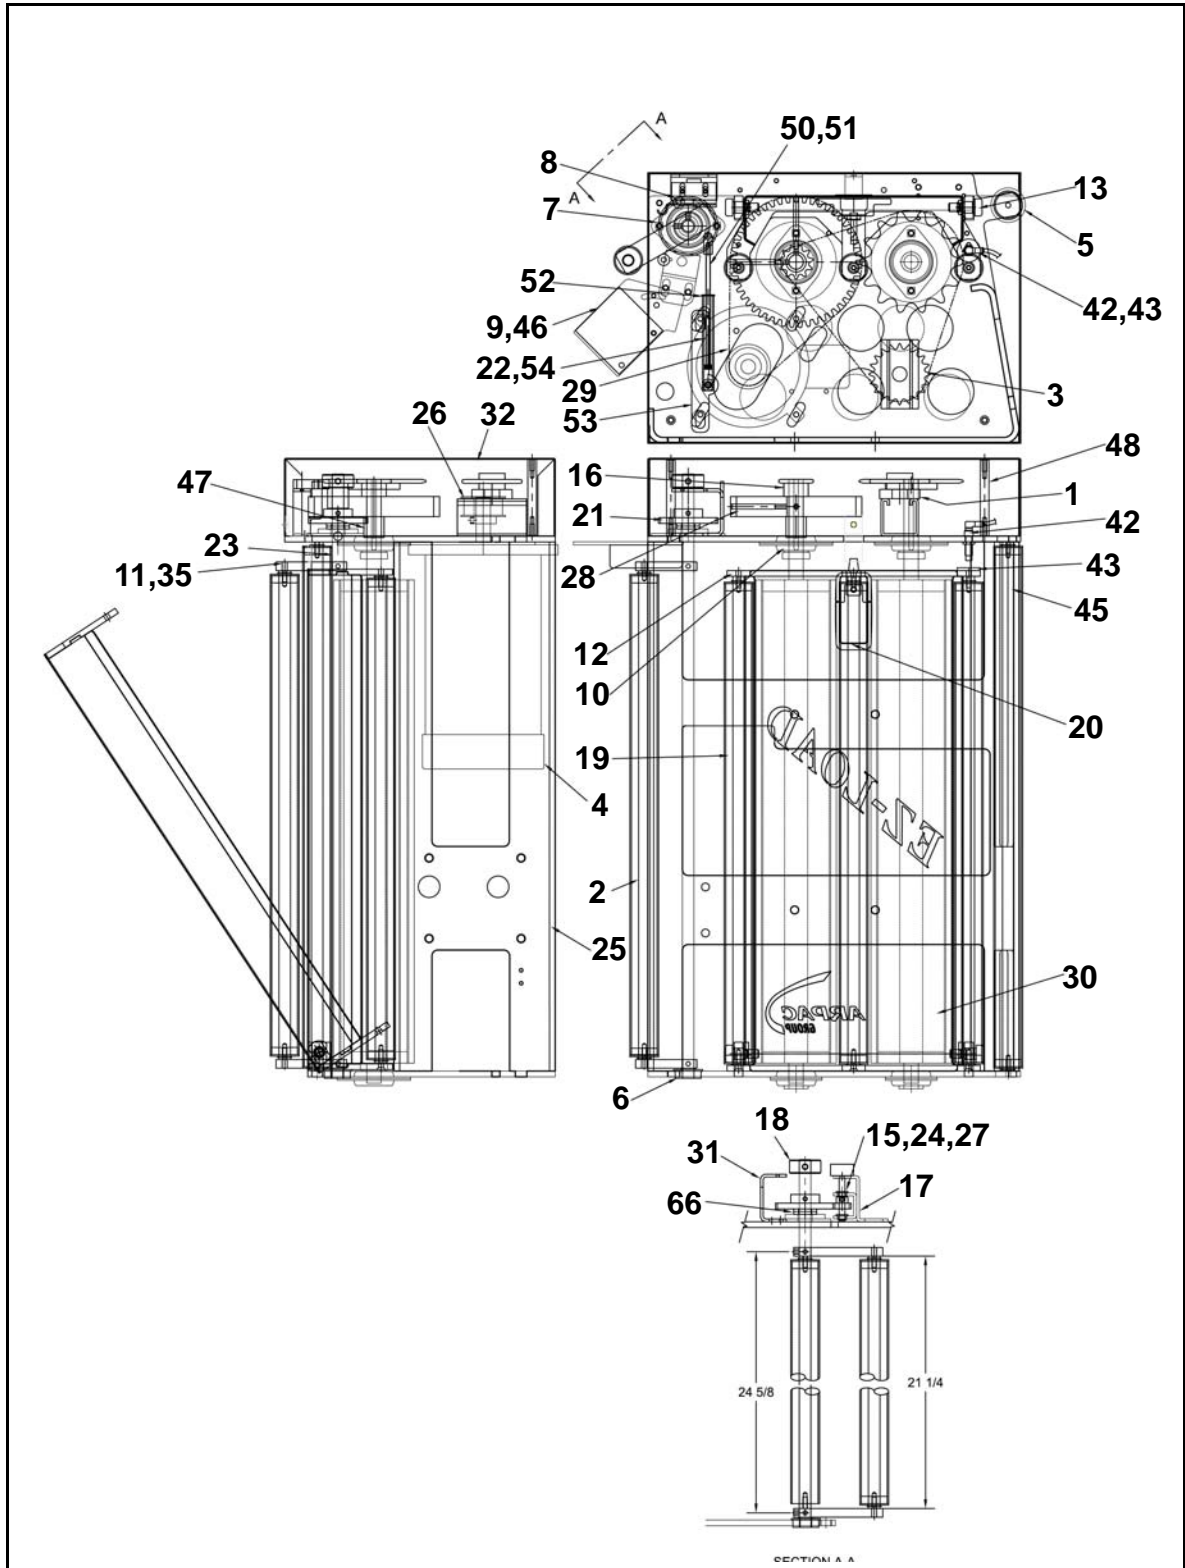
EZ/Pro Side Mounted Film Saver Assembly
